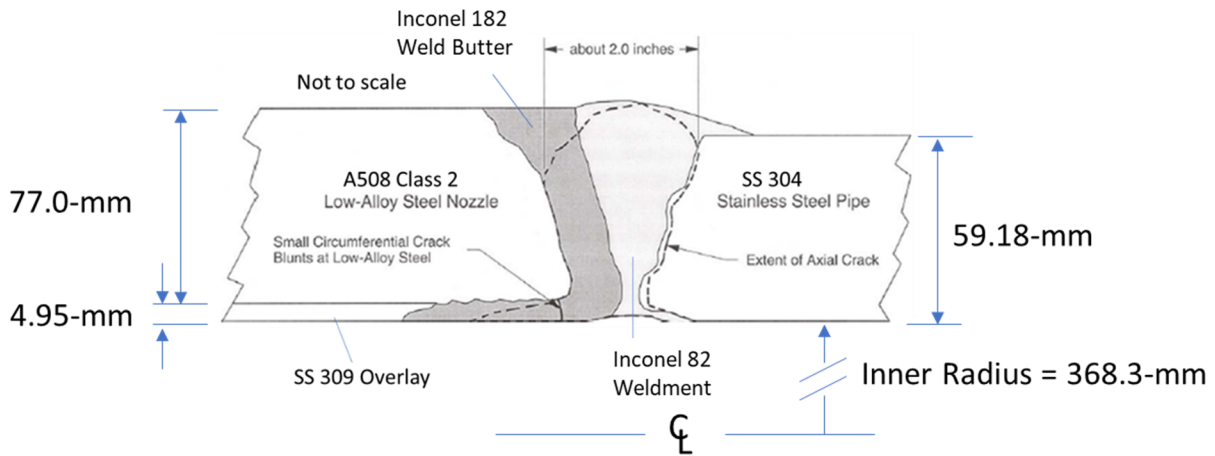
Geometry and Observed V.C. Summer Hot Leg Axial Flaw in a Dissimilar Weld Metal Joint. Based on [6].
